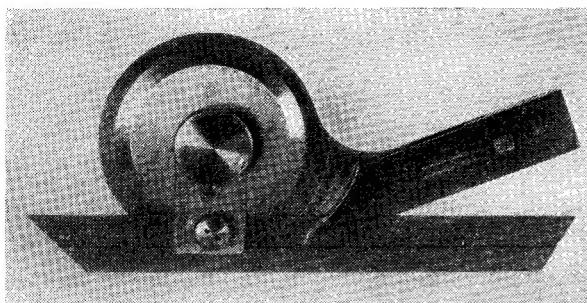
The Brown & Sharpe protractor set to 20 deg.
